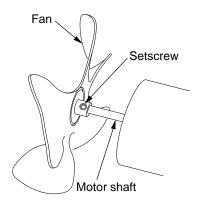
Fan, Motor Shaft, and Setscrew Location
